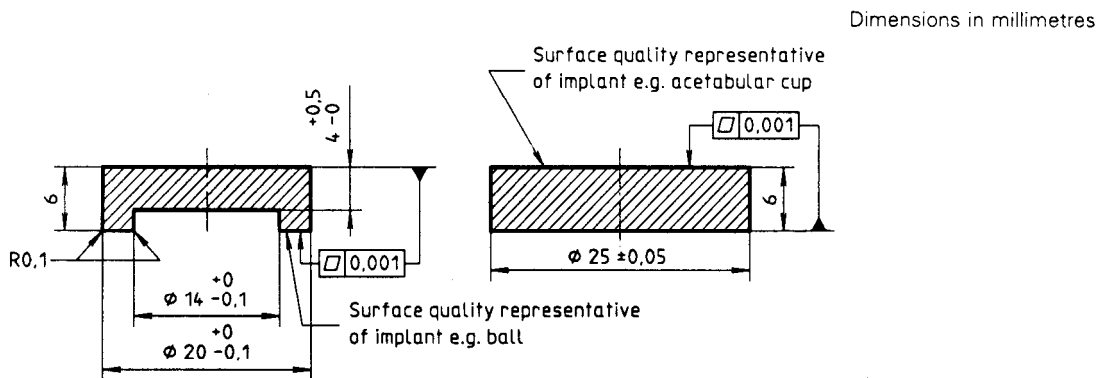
Geometry of ring and disc test pieces with necessary dimensions defined
